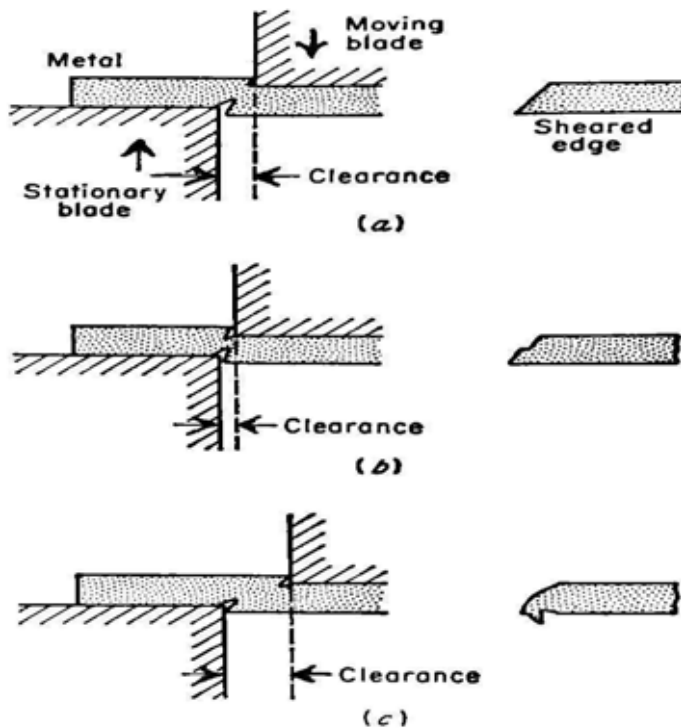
Shearing of metal; (a) proper clearance (b) insufficient clearance (c) excessive clearance.
